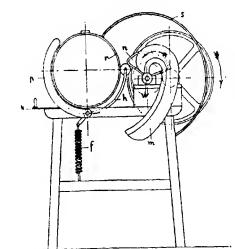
Machine in side view, Fig. 2. - Machine in front view.
